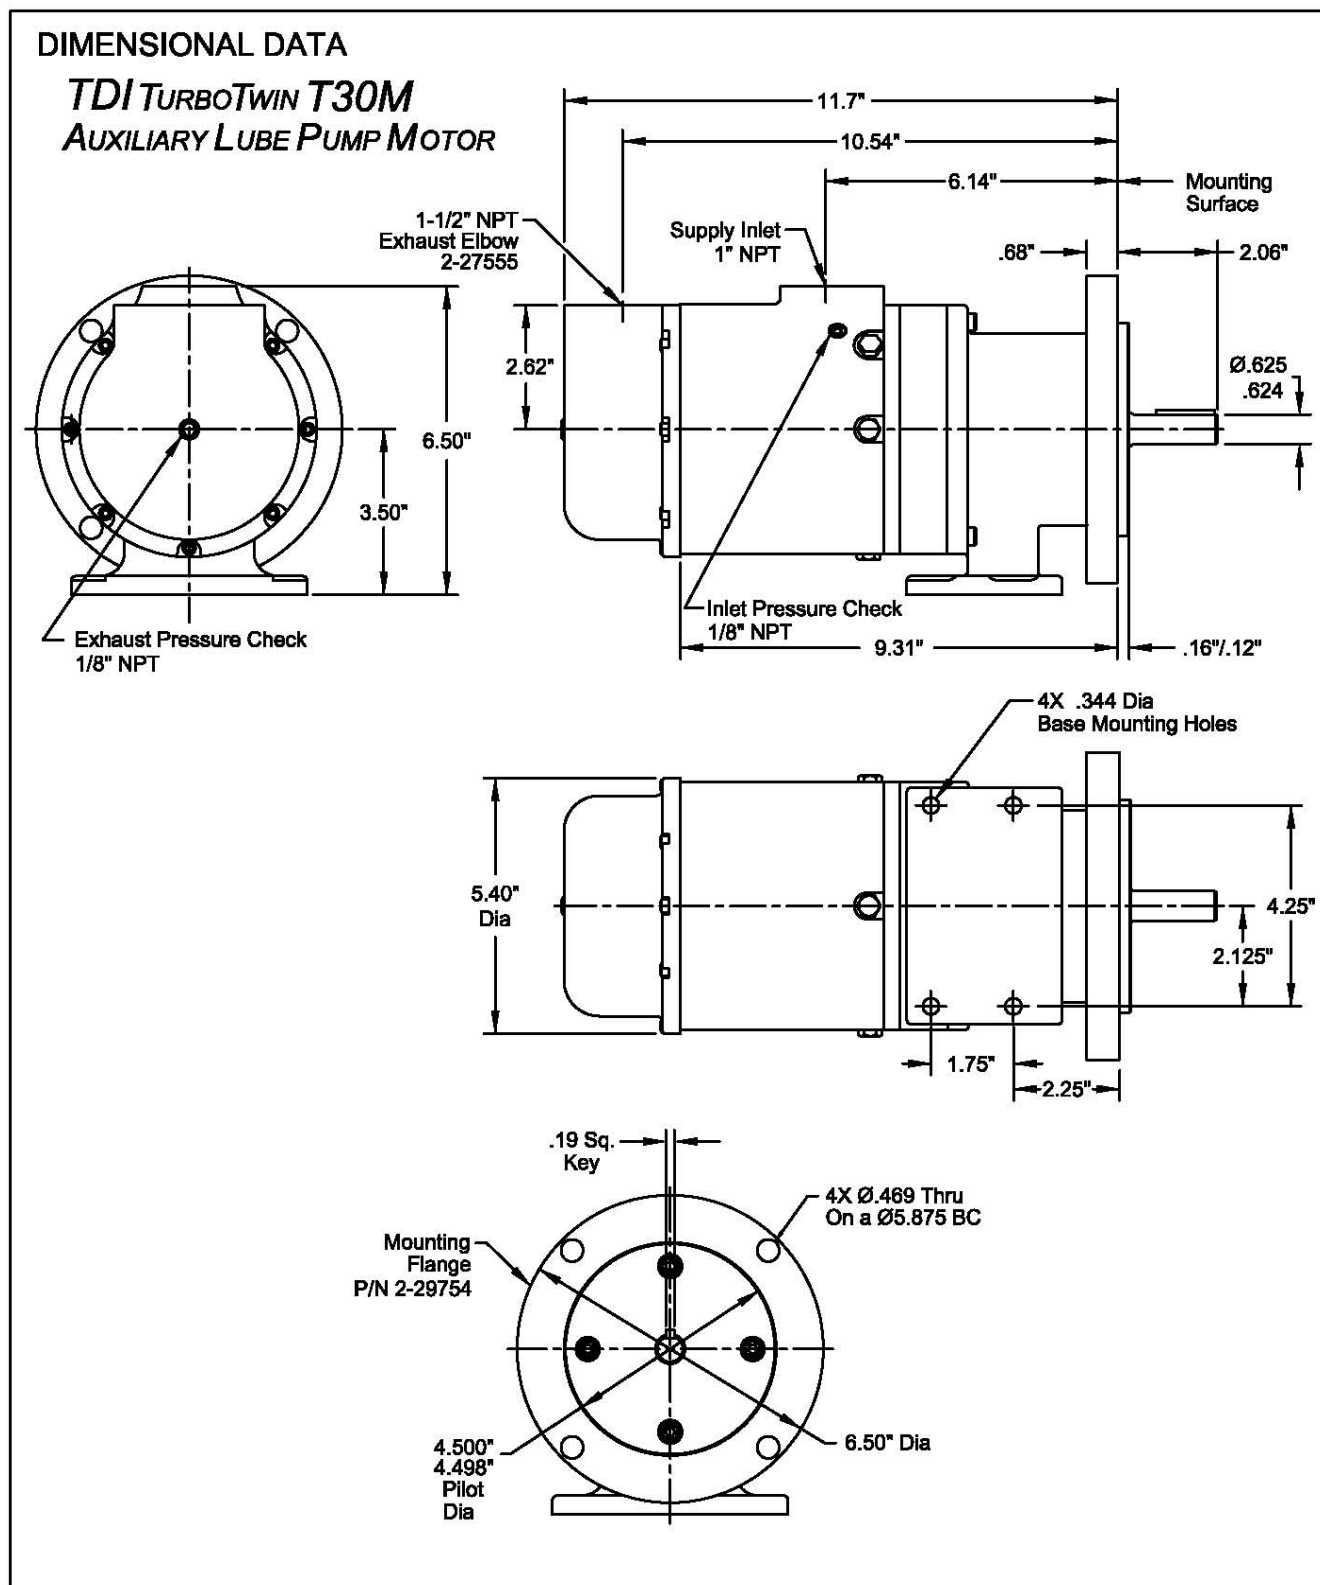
T30-M Lube Pump Motor w/Modified NEMA 56C Mounting Flange
